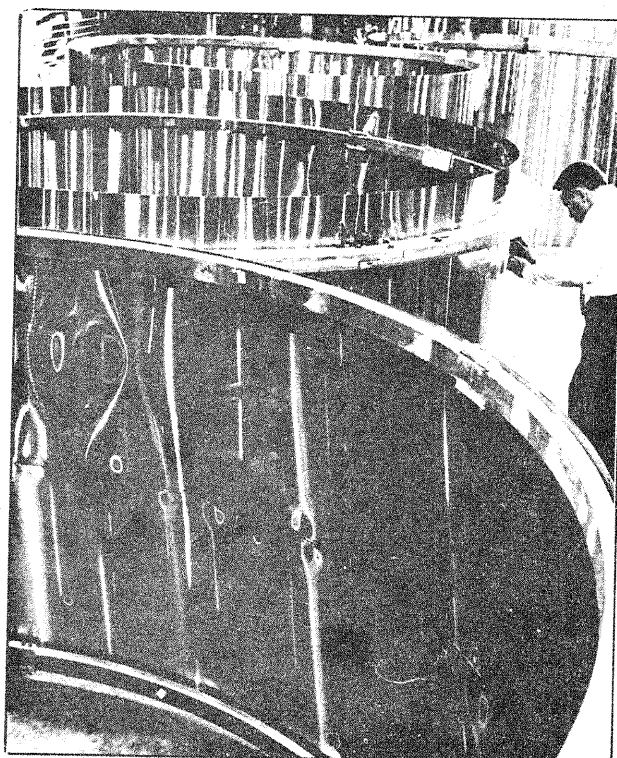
SECTIONS OF ATLAS SHELL UNDER CONSTRUCTION
